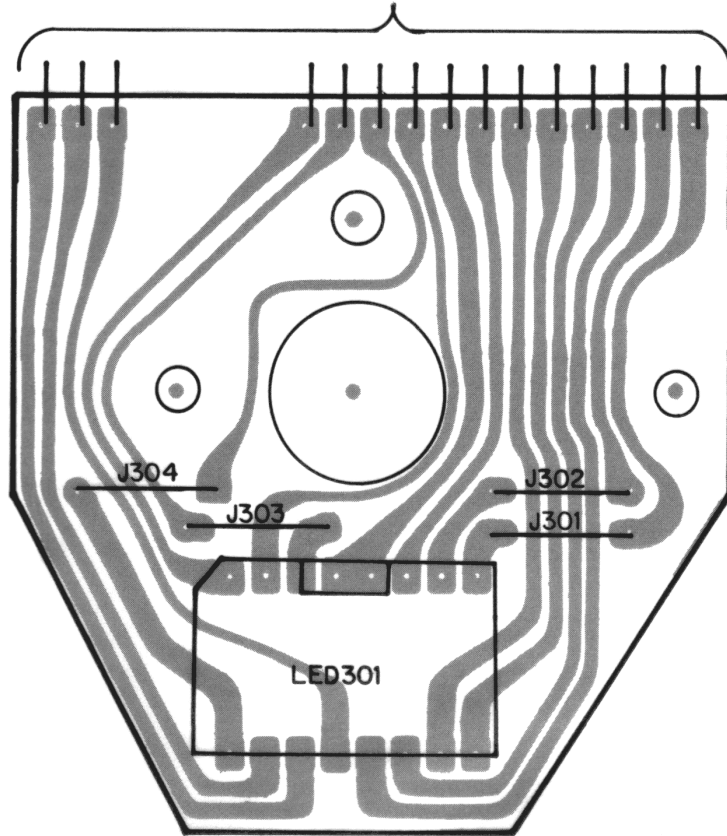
Component Outline, Monitor Receiver P.C. Board
